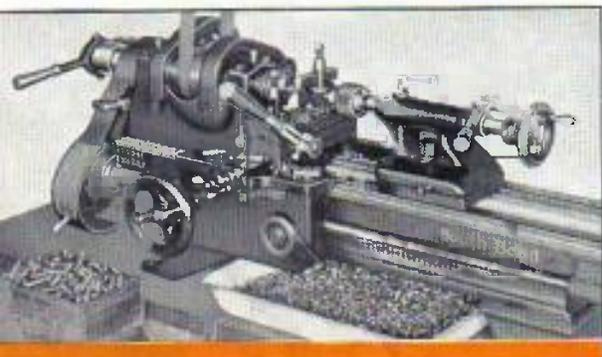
Forming and Cutting-off Duplicate Parts Held in the Hand Lever Draw-in Collet Chuck. (See Prices of Hand Lever Draw-in Collet Chuck, Hand Lever Double Tool Slide and Hand Lever Tailstock on page 21.)
